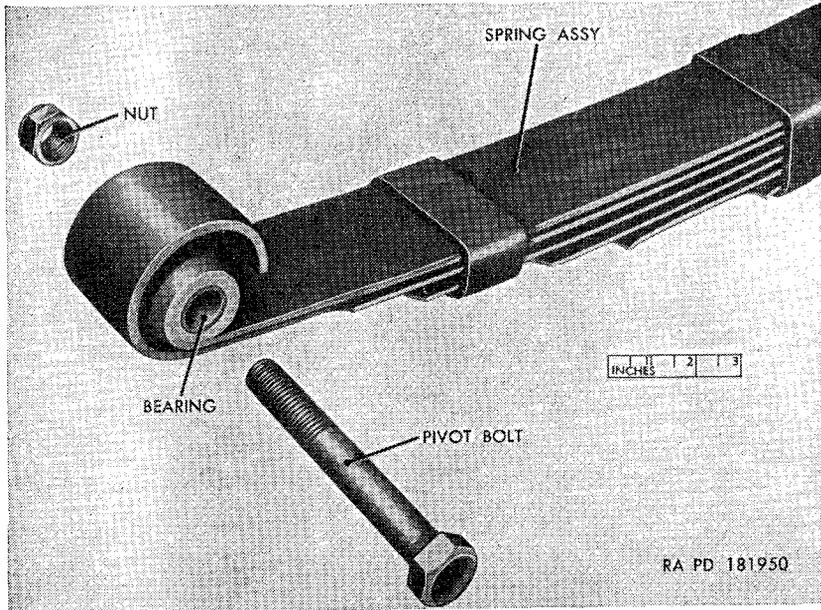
Pivot bolt end of spring—exploded view pivot bolt and nut removed.
